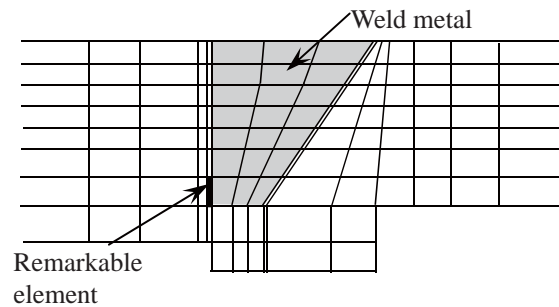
Detail of the weld zone (A-A' section)
